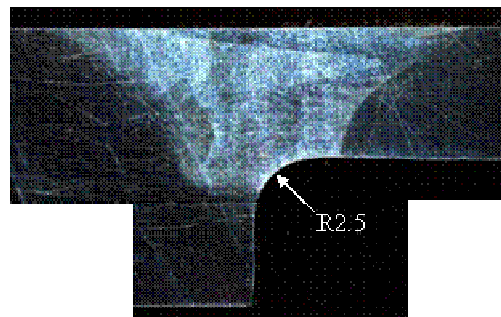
Cross-section of tailored-blank weld produced using anvil with fillet radius
